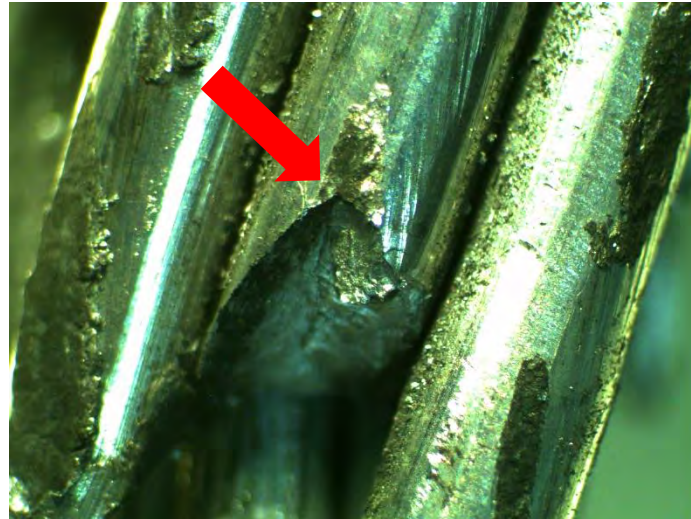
The failure section of a wire with crack initiation in the fretting area
